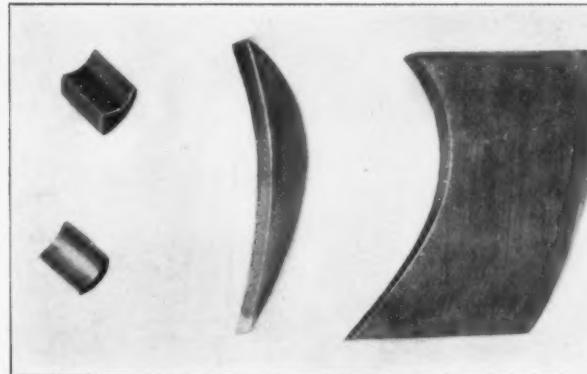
SHOWING LARGEST AND SMALLEST BLADES AND PACKING PIECES FOR A PARSONS TURBINE.
